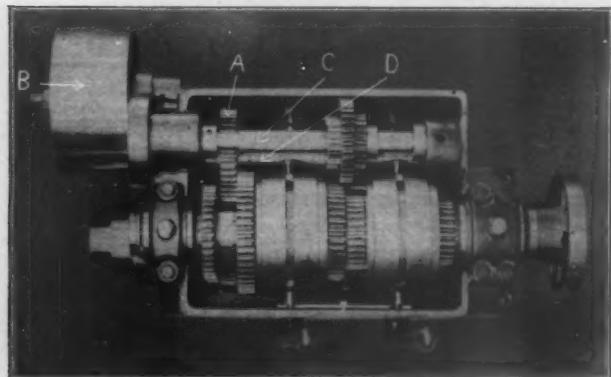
View Looking Down on the Headstock, with Gear Guards Removed.
